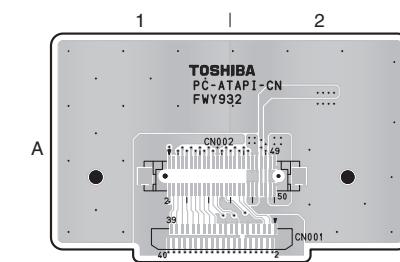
ATAPI PC Board (Bottom side)
